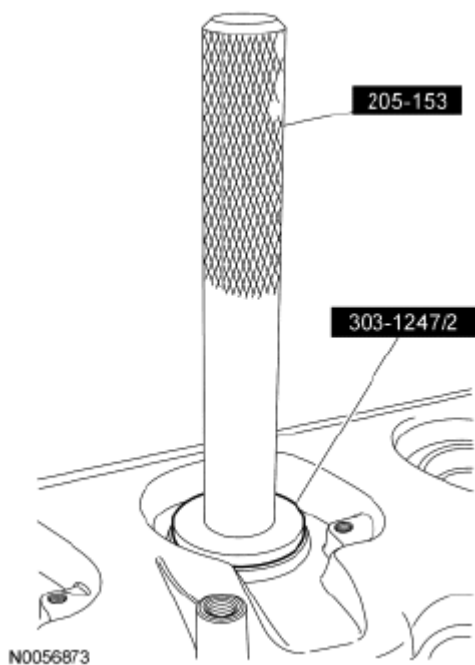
Identifying VCT Spark Plug Tube Seal Installer And Handle
